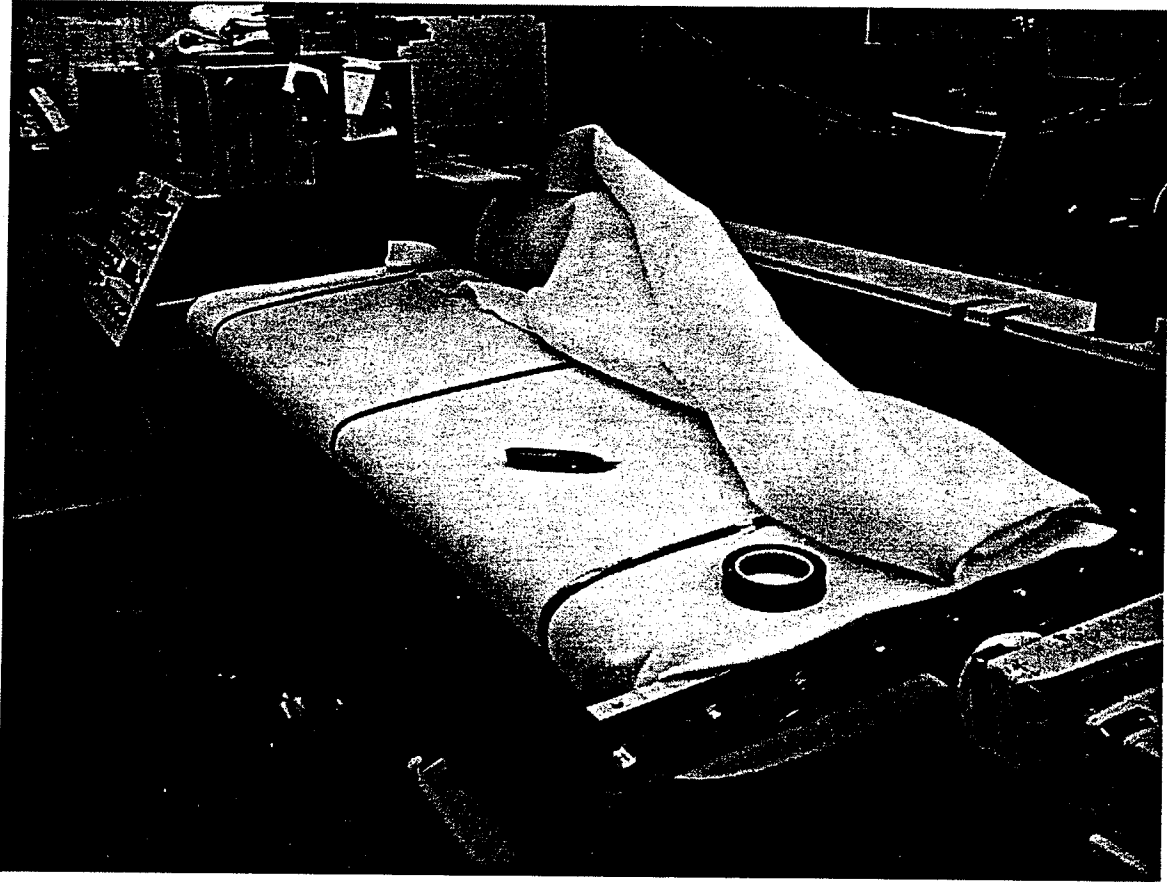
Vacuum bag assembly before the insertion of the aluminum plates.
